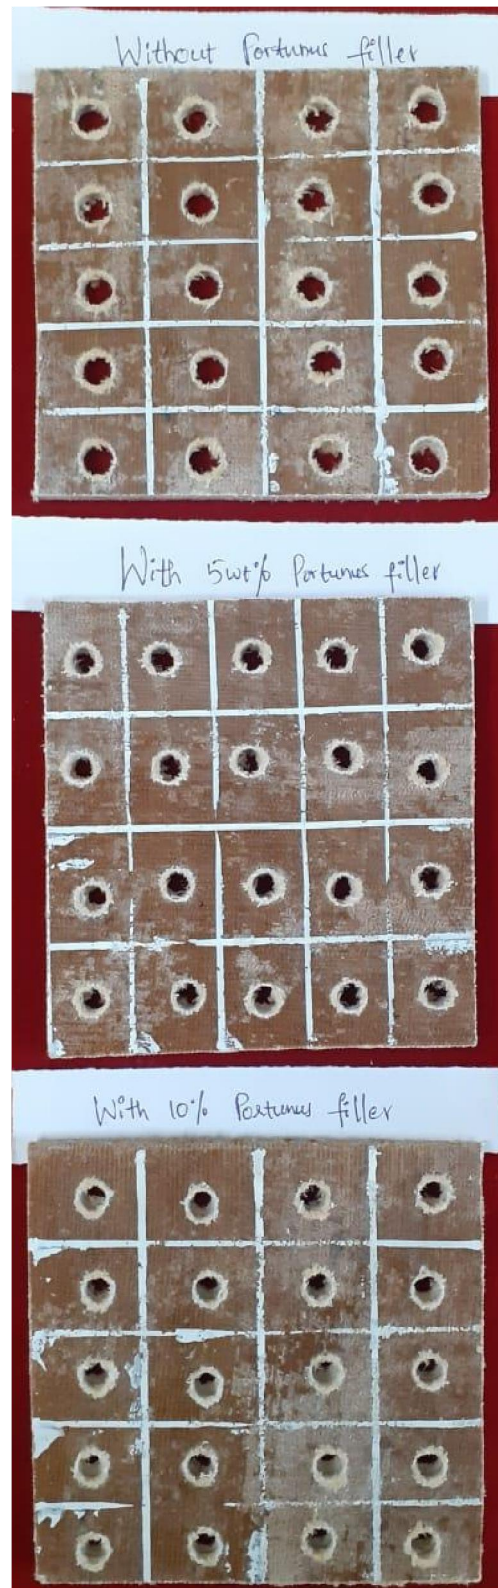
Workpieces of KAL, PKAL-5 and PKAL-10 after drilling with varying Portunus filler inclusion (Without Portunus filler, with 5 wt.% Portunus filler and 10 wt.% Portunus filler)
